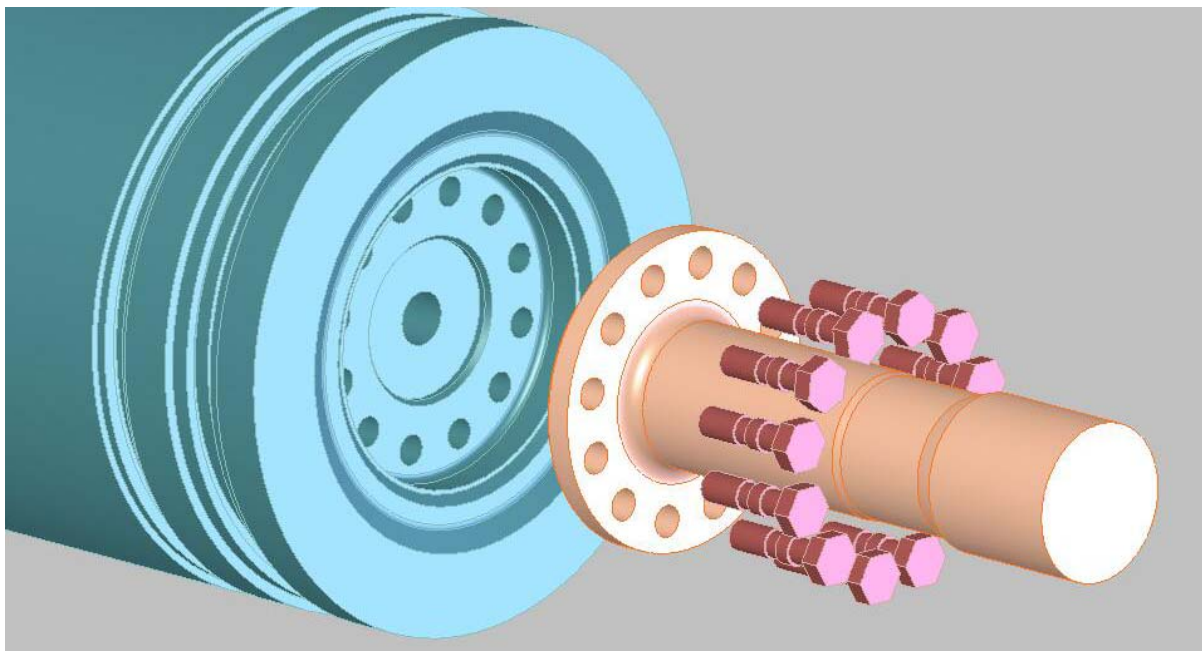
The stub shaft, bolting and LP Spindle component parts are shown disassembled.
